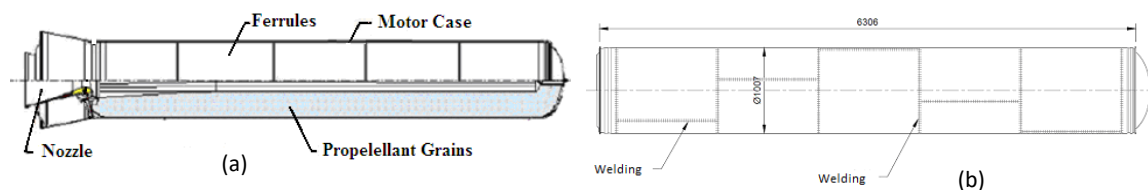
(a) basic components of rocket motor; (b) positions of welding in cylindrical metal structures (Brazilian VLS-1).
